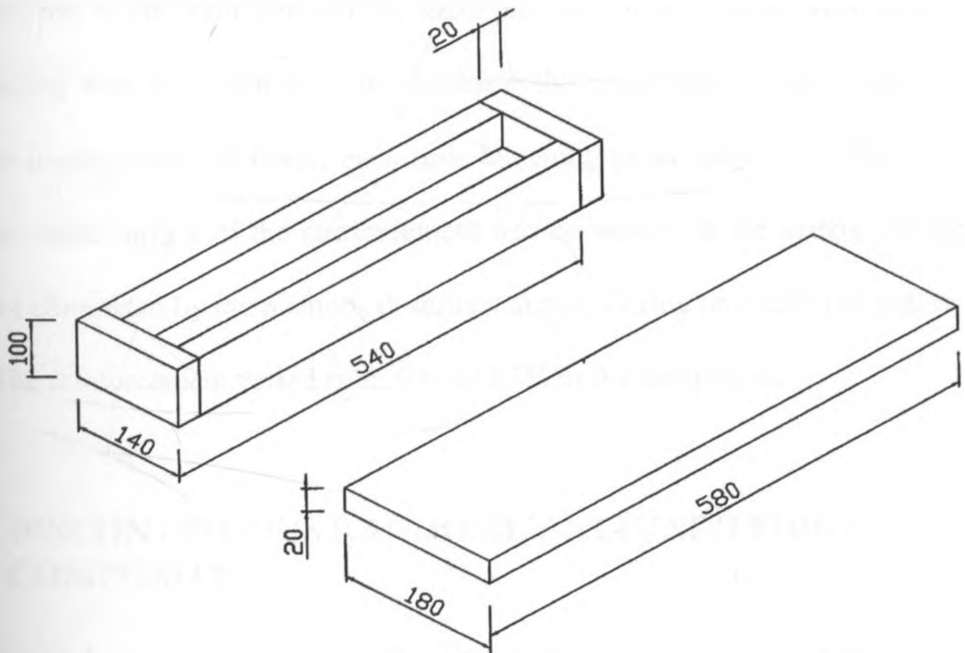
Steel moulds for casting Sisal/Epoxy flexure test specimens
